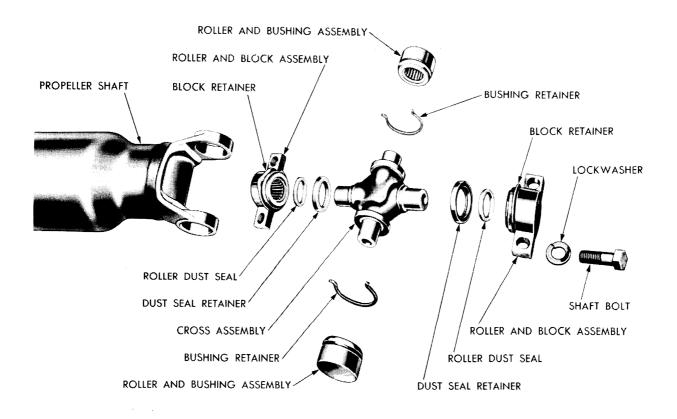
Rear Universal Joint—Cross Type (Disassembled View)
